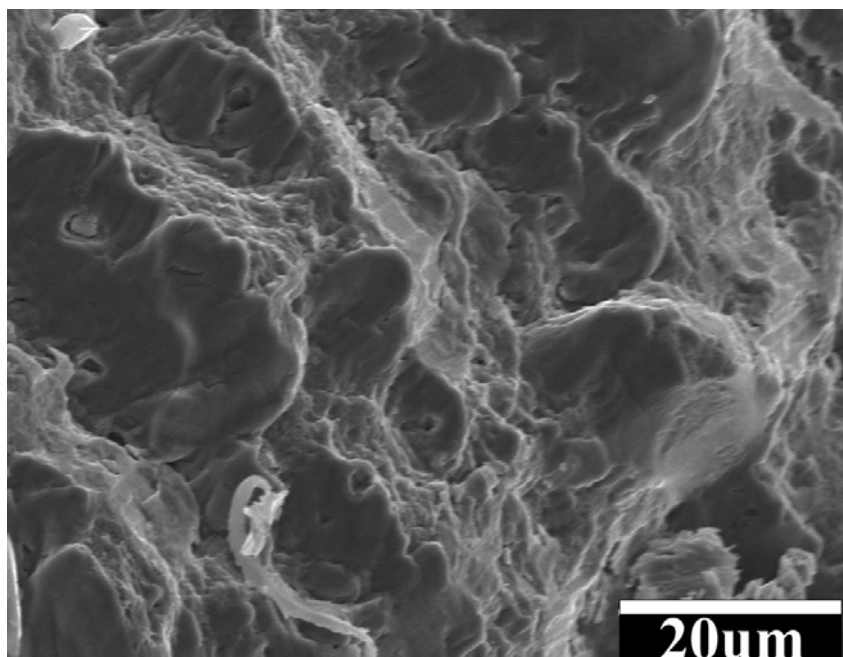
Microscopic View of Large Fatigue Facets of the FCG Region on a Straight Cylinder Specimen Fracture Surface, $S_a = 392$ MPa (Specimen G7)
